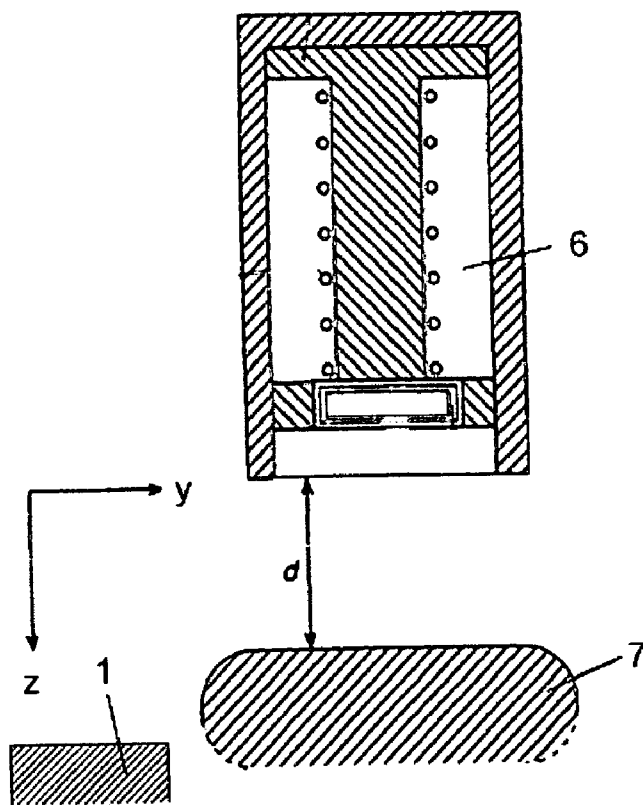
Cross-section of the Odometer, Railhead and Coded Tag
